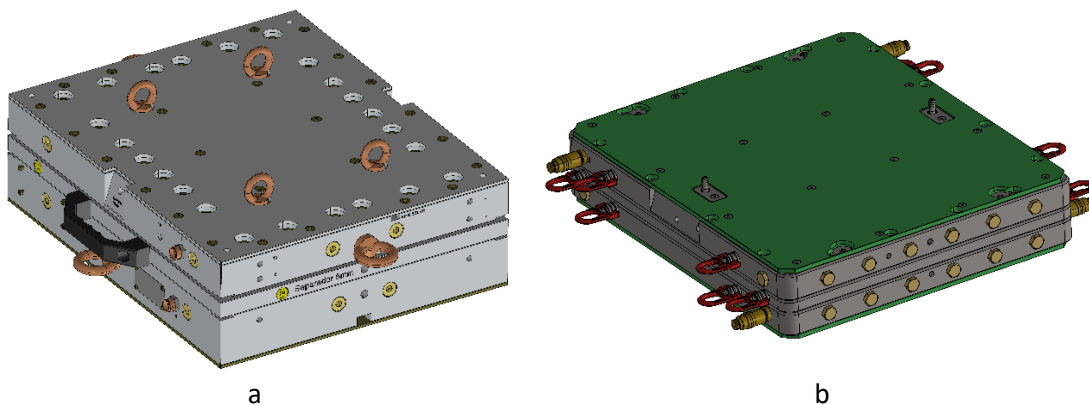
Molds for conventional RTM. a) Aluminum mold of 380 x 220 mm cavity. b) Steel mold of 505 x 605 mm cavity
